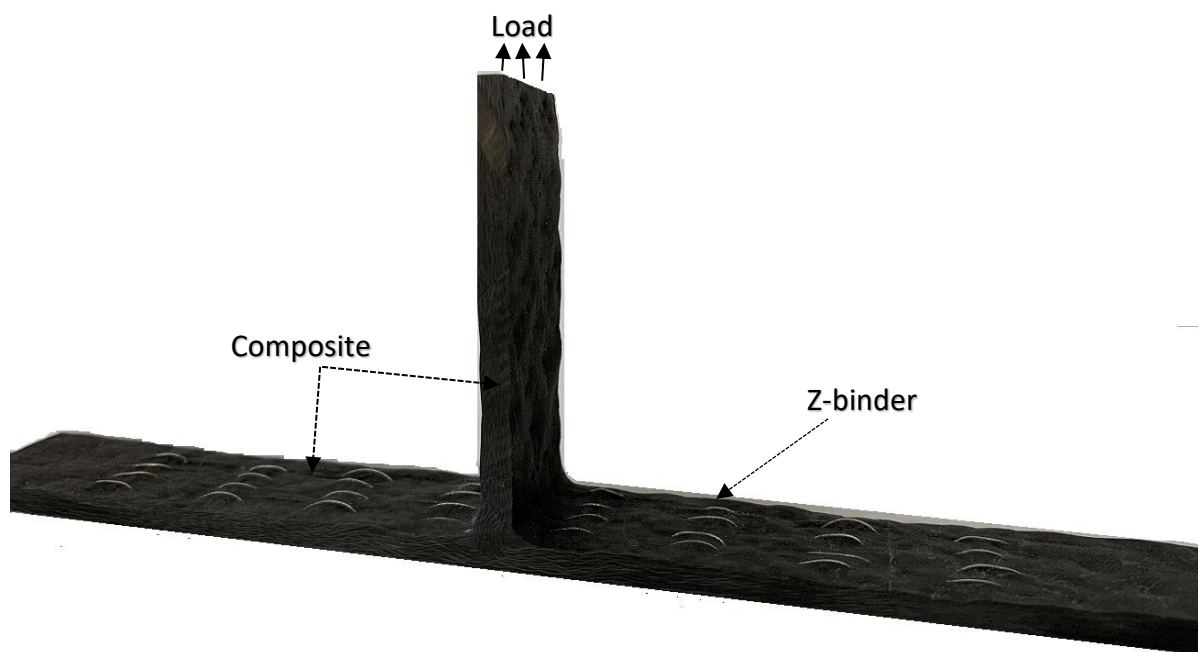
Photograph of cross-sectional views of a T-joint specimen containing woven z-binders.
